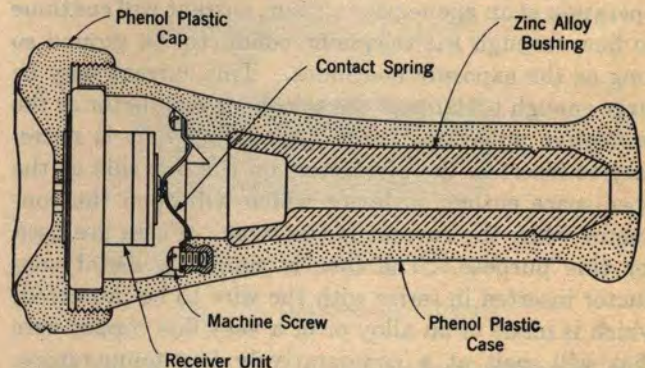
RECEIVER UNIT AS MOUNTED IN DESK STAND
